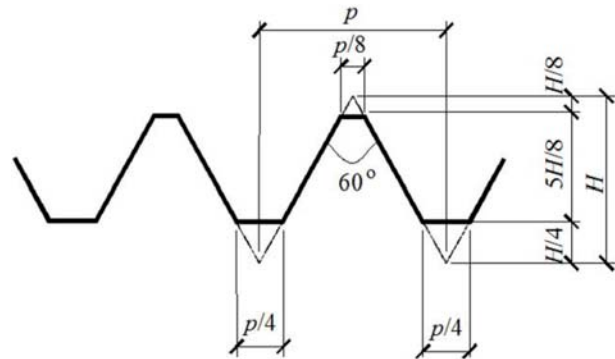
Screw thread dimensions of high strength bolts for steel structures.
